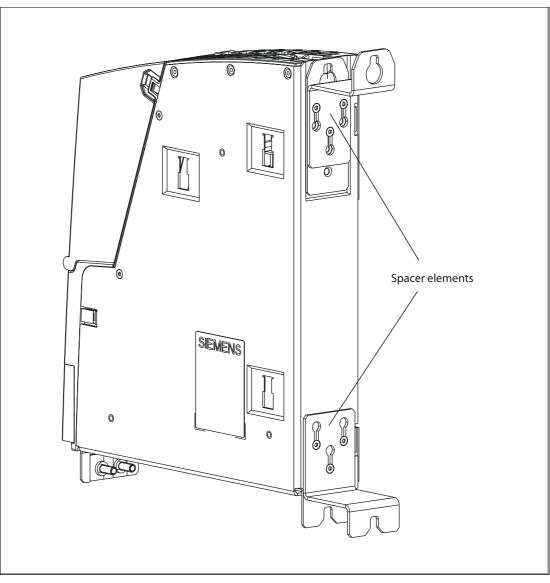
Installing the CU320 on a mounting surface using spacer elements
